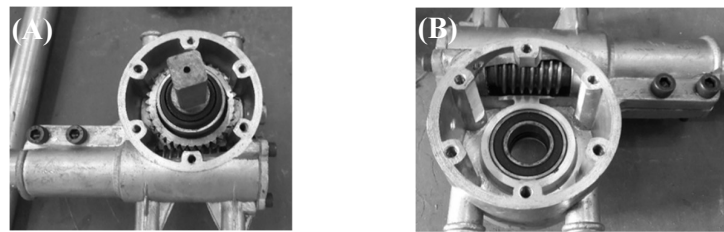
Worm gearing showing the worm wheel (A) and (B) worm screw.
